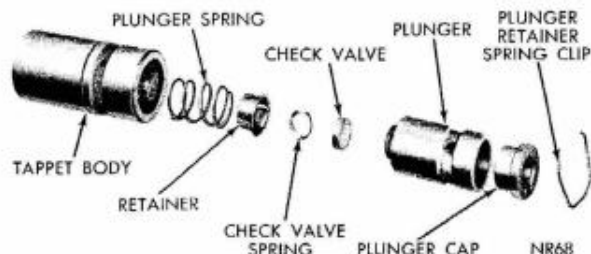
Hydraulic Tappet Assembly (Disassembled View)
